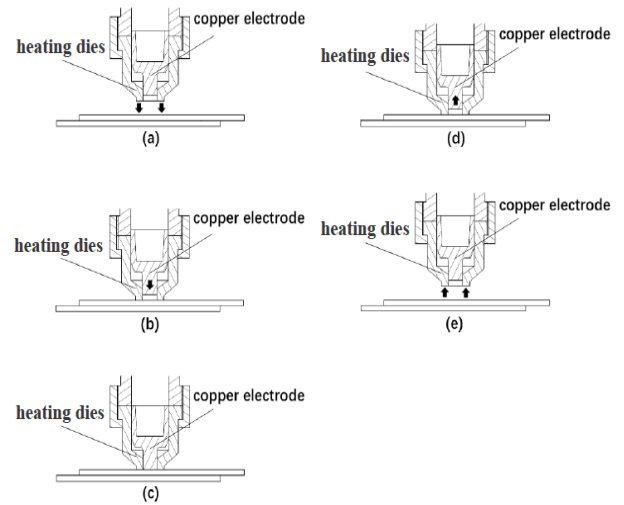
Process step of heating and welding process: (a) overlapping of plates, (b) pressing and heating by heating dies, (c) applying of welding current by copper electrode, (d) separation of copper electrode (e) separation of heating dies [9]
